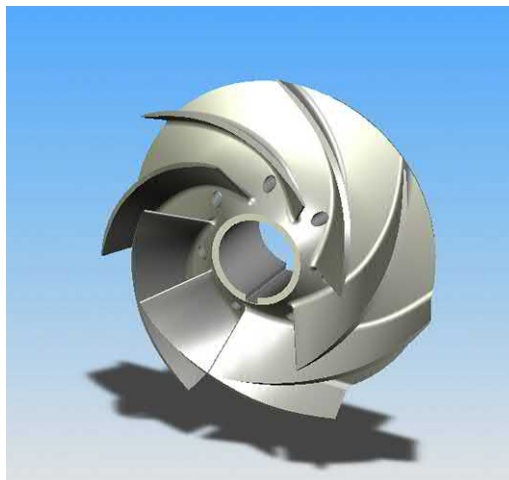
Front view of mixed flow open impeller. Such impeller may or may not be furnished with back pump out vanes.
